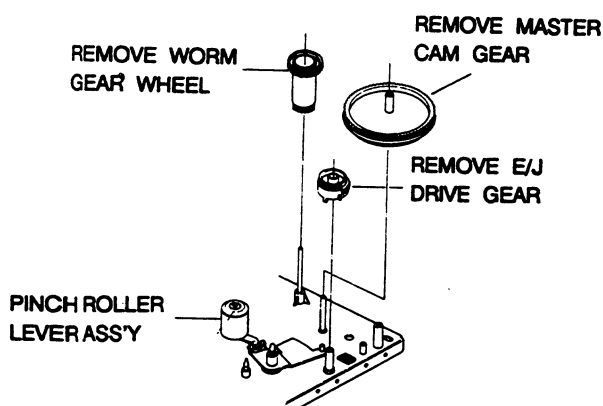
Worm Gear Wheel, Master Cam and Eject Drive Gear Removal.
